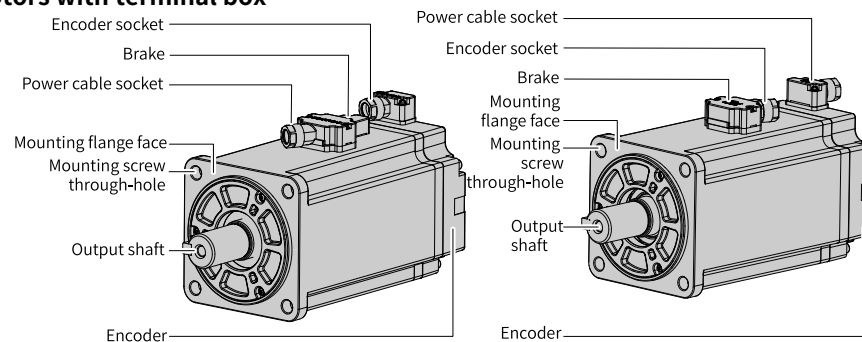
Components of motors with terminal box (left: front outlet; right: rear outlet)
